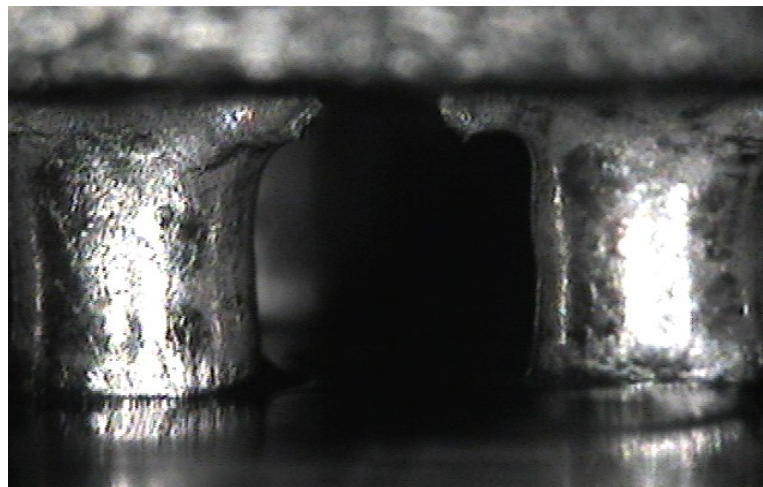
Outer row solder joints from Fig. 10 reworked using a hand held hot-air system. 修正后的外排焊锡点。
